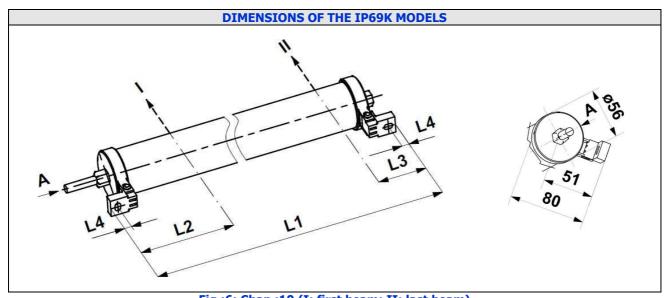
; Chap.:10 (I: first beam; II: last beam)
